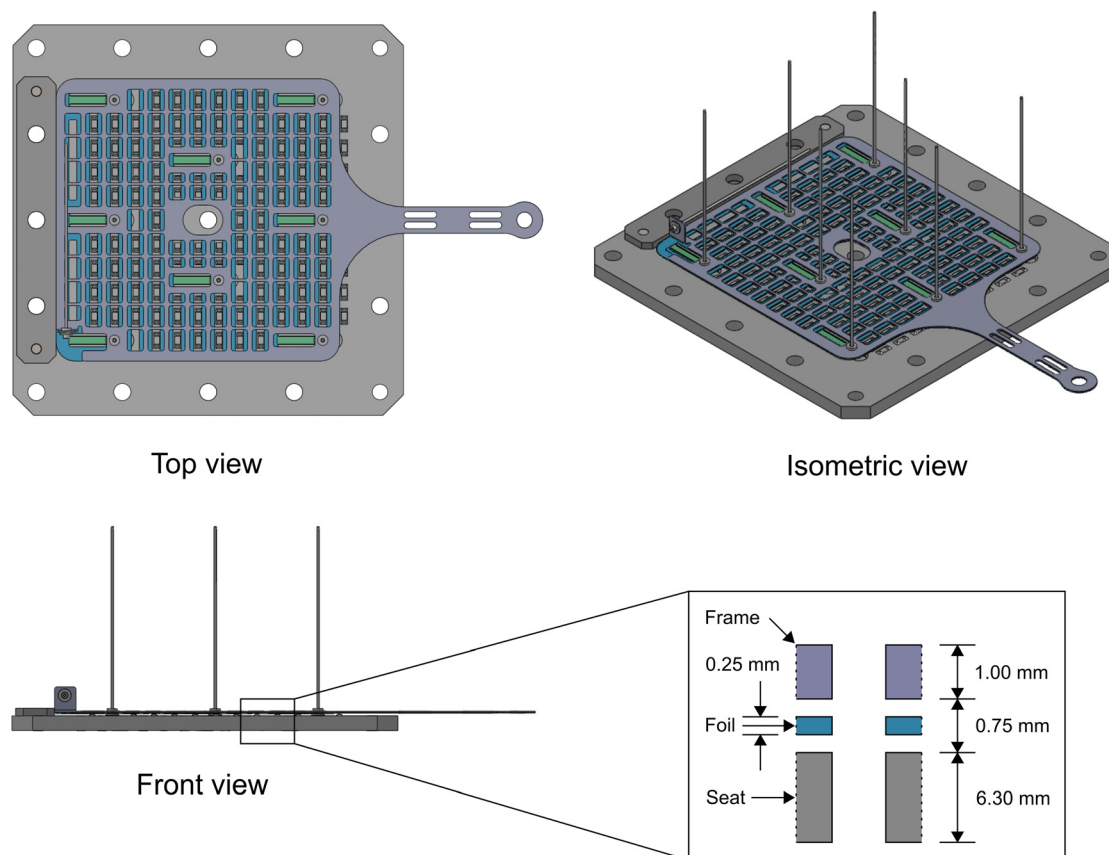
Different views of the screen valve assembly. A section of front view is enlarged (not to scale) to specify the arrangement of components.
